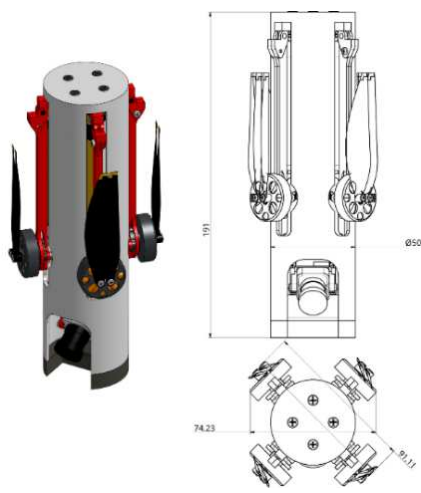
Three-view drawing of quadcopter in folded configuration at maximum operating empty mass (MOEM). Dimensions shown in millimeters
